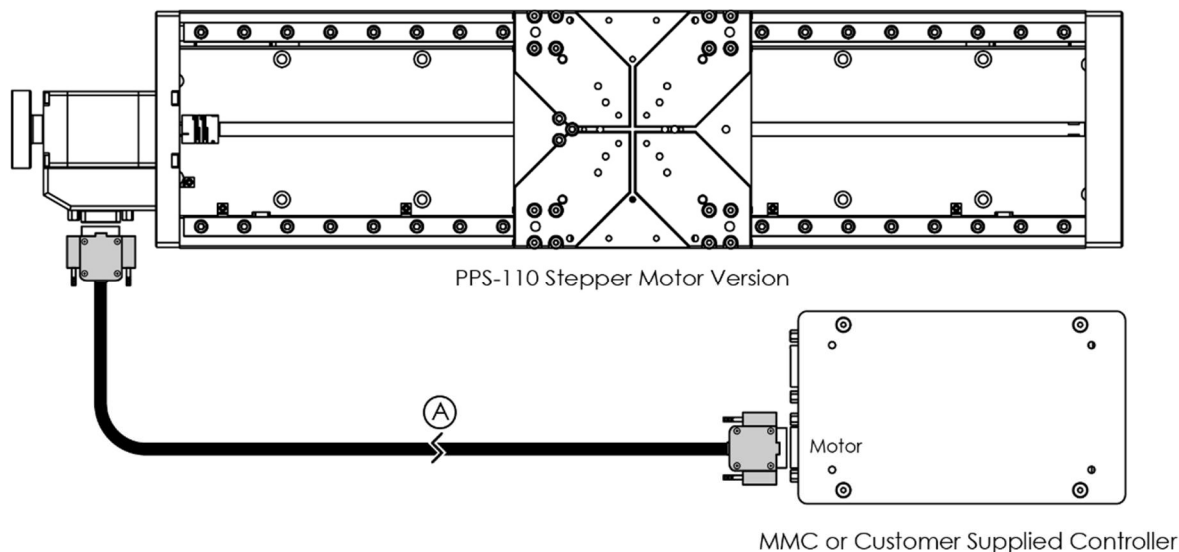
PPS-110 Stepper Motor Version Wiring Diagram
